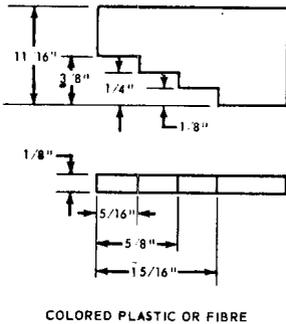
Depth Guide for Soldered Connections on Terminal Strips
